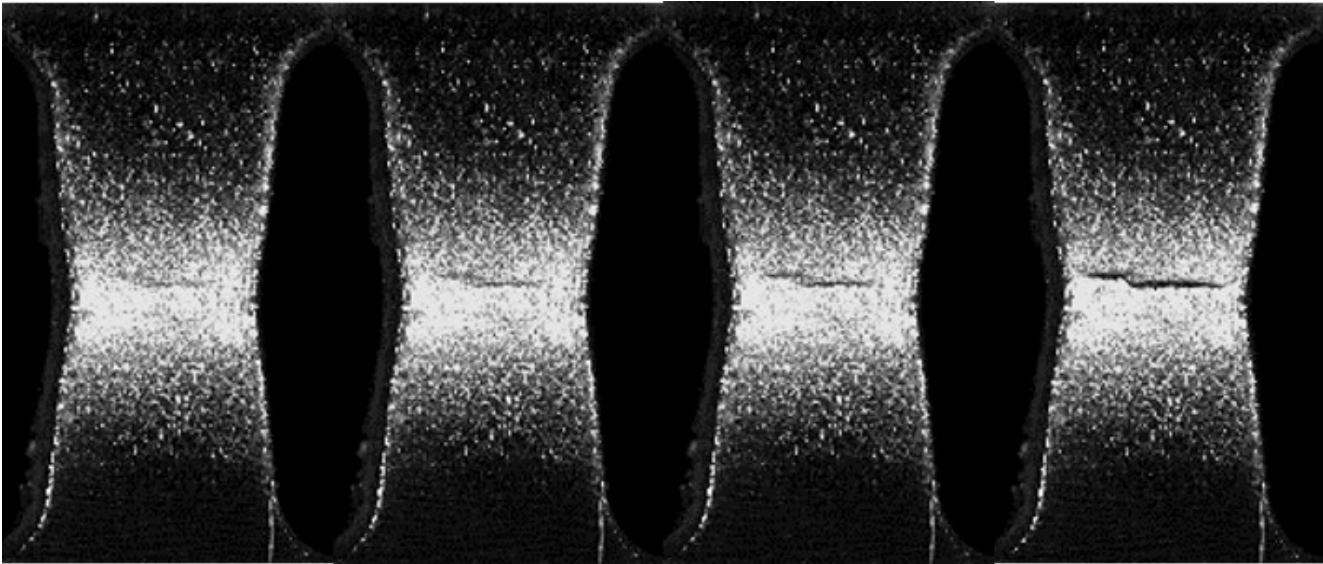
HSC images of tensile test performed after H pre-charging (0.8 mA/cm²) at strain rate of 1.67 s<sup>-1</sup> during fracture.
